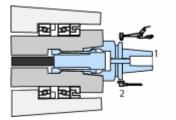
Tool/Tool Holder assembly to spindle - direct transfer function measurement on the tool holder shank (TF 11)
